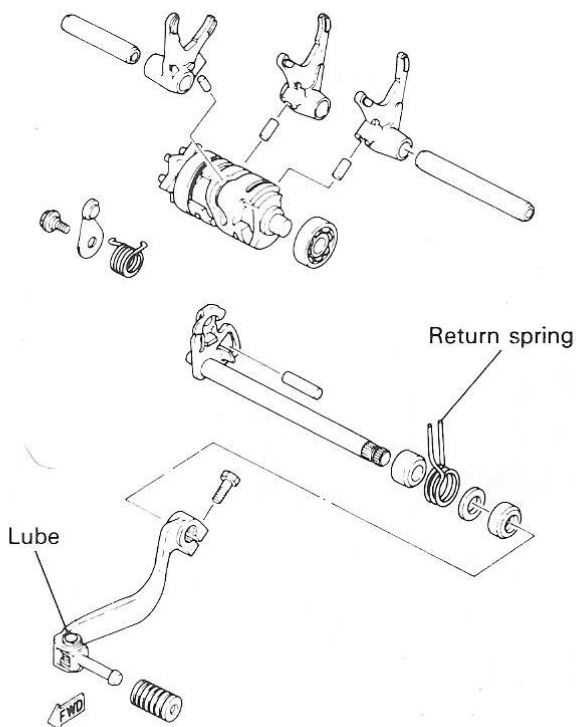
A.20 YTZ 250 shift linkage components — exploded view (Sec 3)
